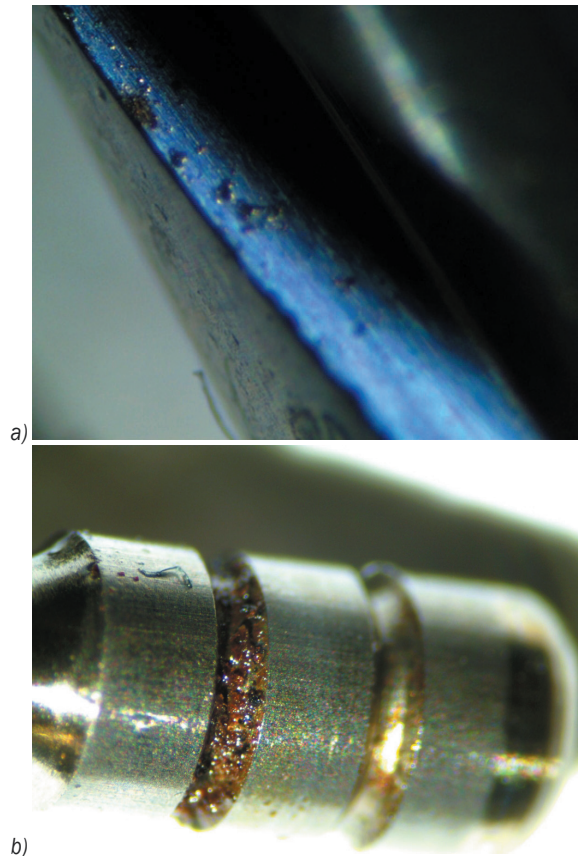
Local corrosion of example parts of Delphi fuel injectors; a) needle and b) head
